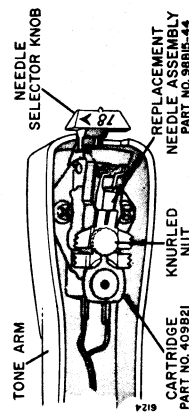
Cartridge and Needle Assembly Used in RC624 and RC674 Record Changers.
